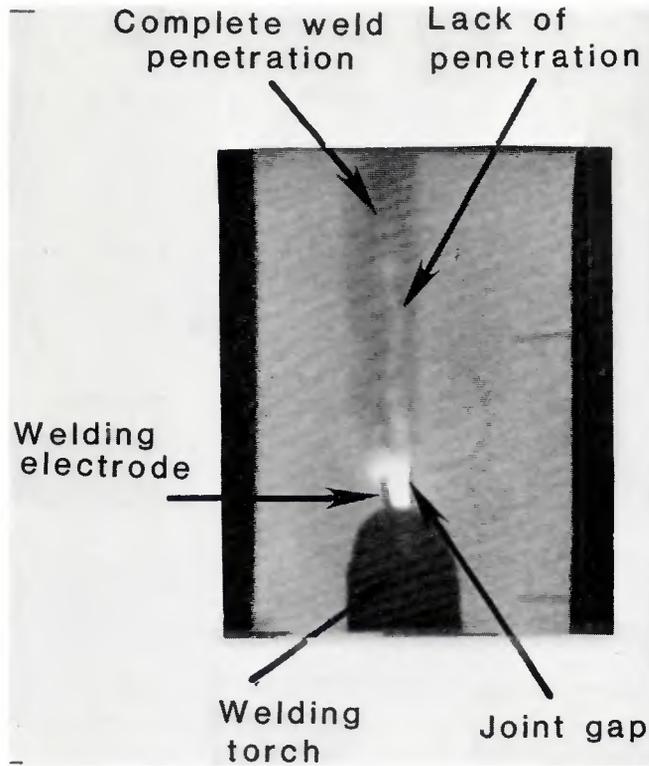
Example showing one frame of the real-time radiographic image for submerged arc welding.
